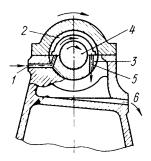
Oil circulation system for bearings lubricated by circulating oil
